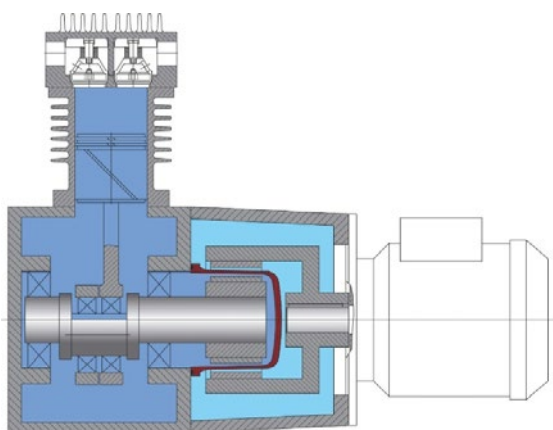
magnetic coupling, a schematic drawing of setting up with a crankshaft, inner rotor, split pot, outer rotor and electric motor
